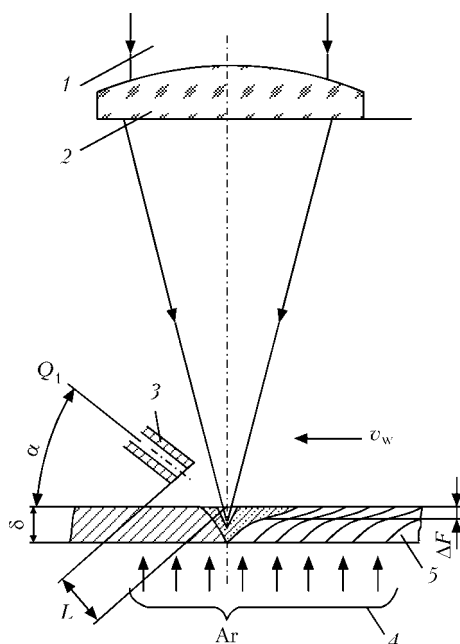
Scheme of laser welding with shielding gas fed ahead of the welding head: 1 – laser radiation; 2 – focusing lens; 3 – nozzle for feed of shielding gas; 4 – shielding of weld root; 5 – workpiece
